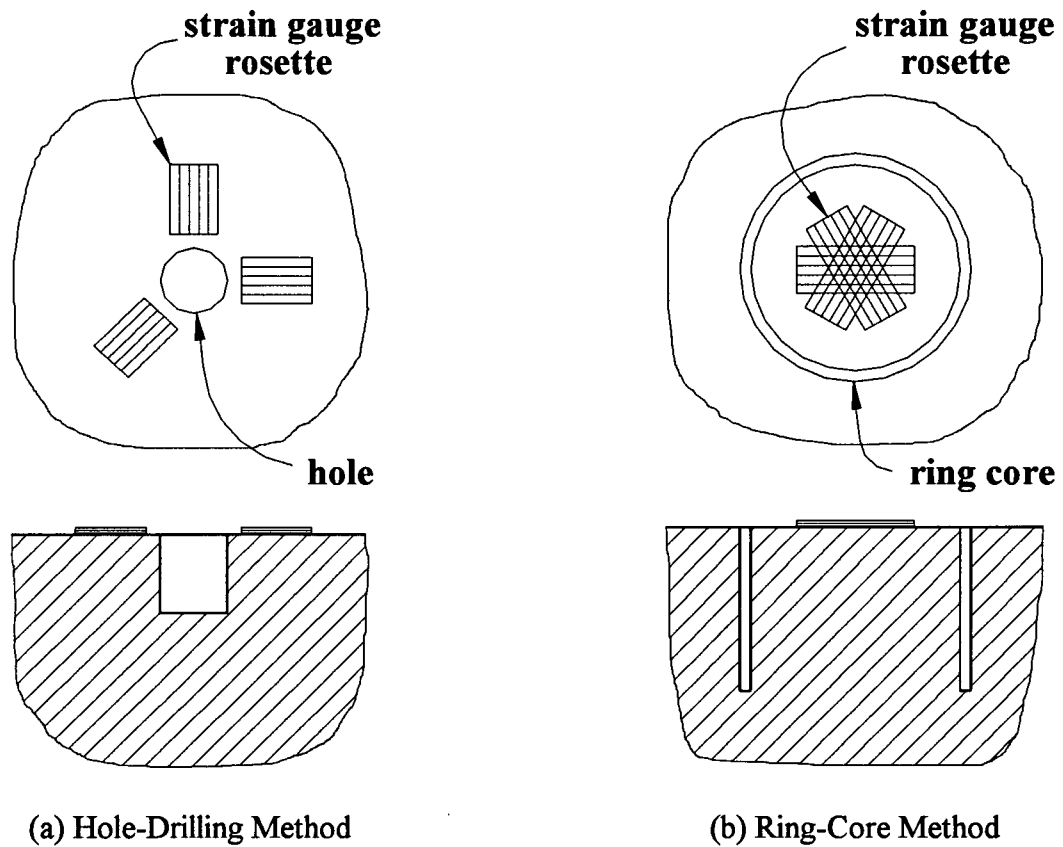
Hole-Drilling and Ring-Core Methods.
